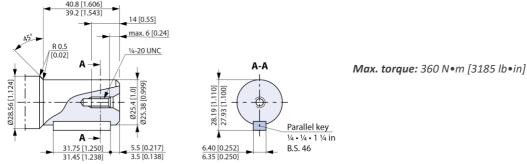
OMP shaft version: Cylindrical shaft 1 in; Parallel key B.S. 46 (US version)
